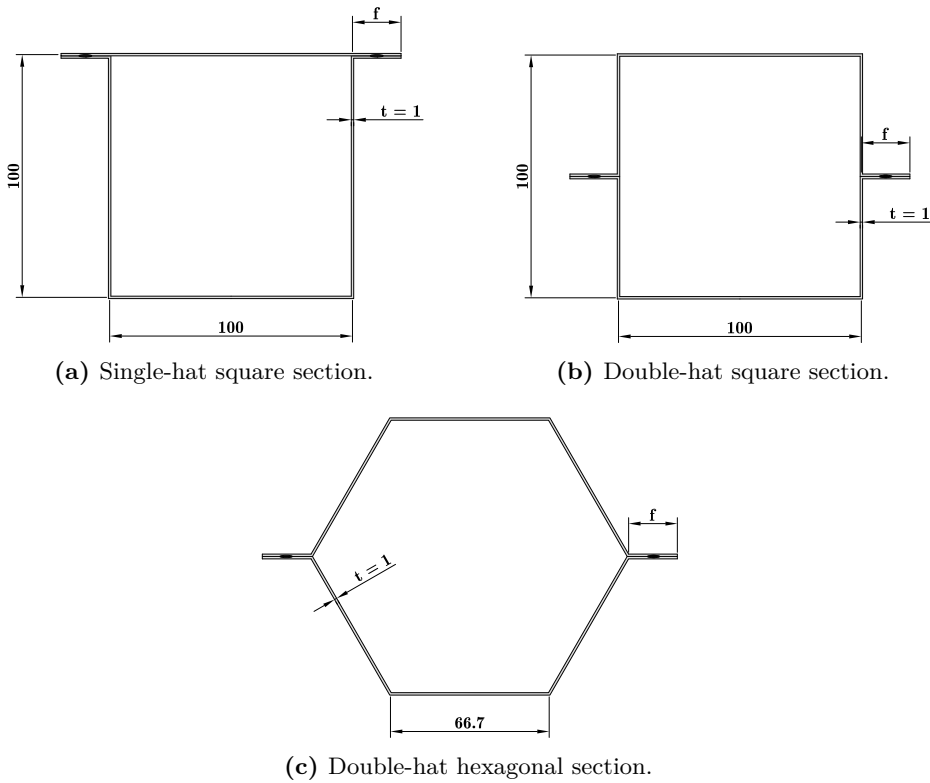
Different cross-sections considered for the outer cold-formed tube of the crash box. Spot welds are indicated in the flanges. Dimensions in millimeters.
